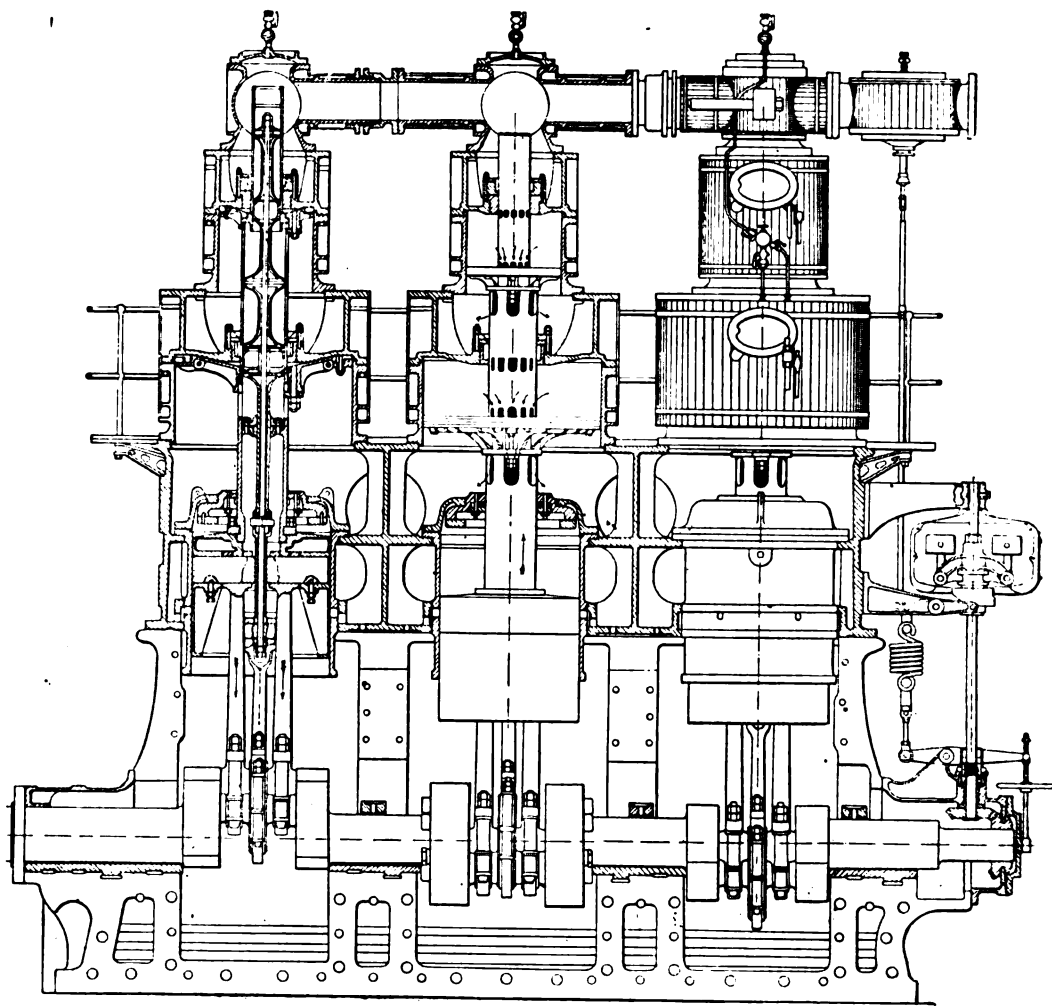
High-Speed Central Valve Engine. (Willans & Robinson, Ltd.)
